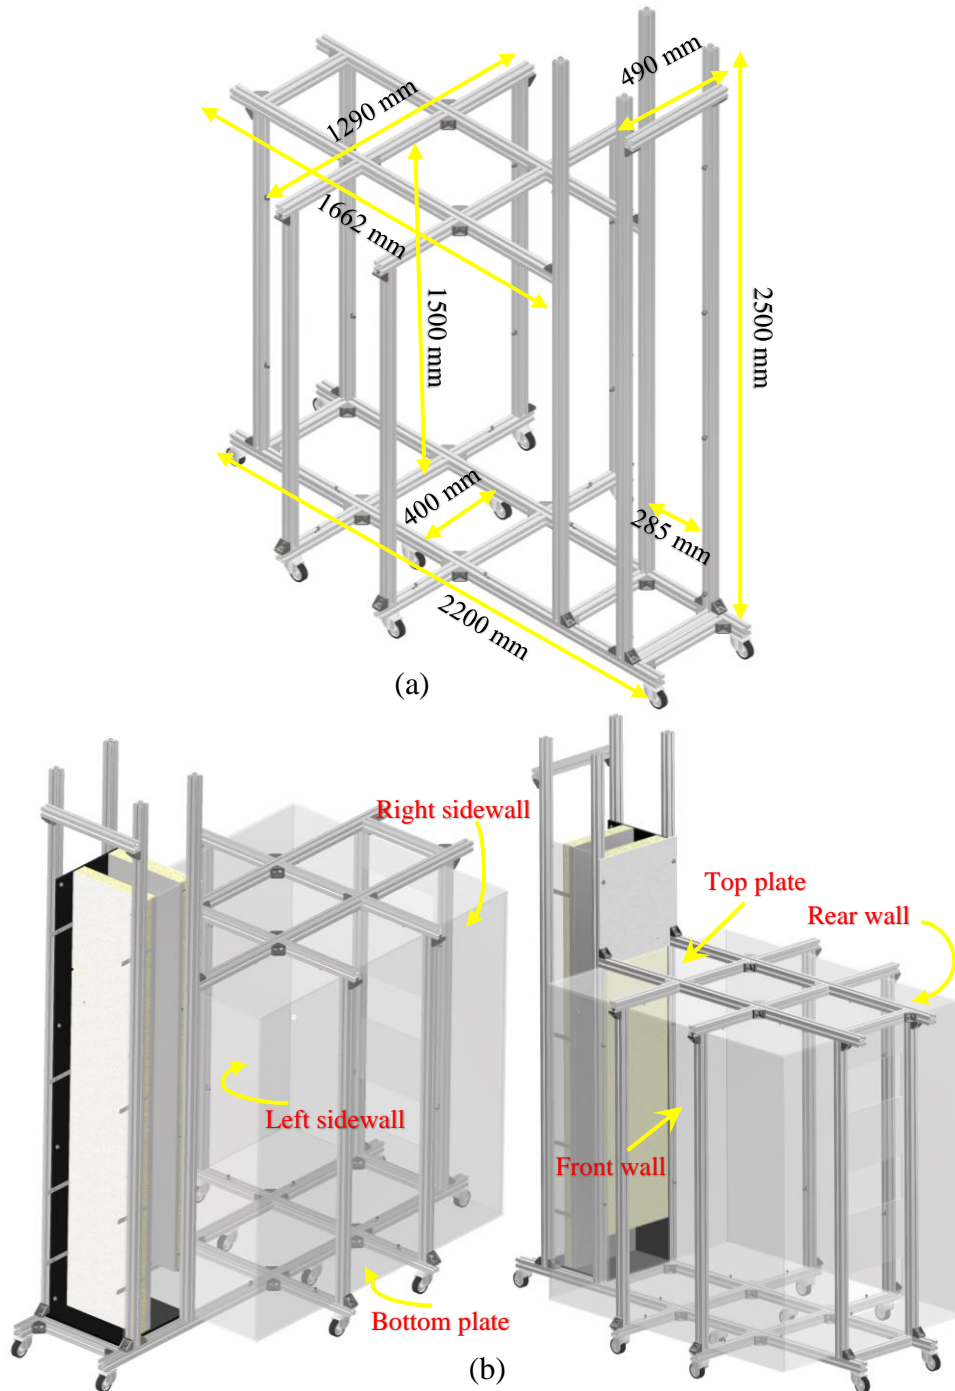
Mounting of Experimental bench on T-slot Extrusion Aluminium frame: (a) Aluminium frame design (b) Chimney and room inside the frame.
